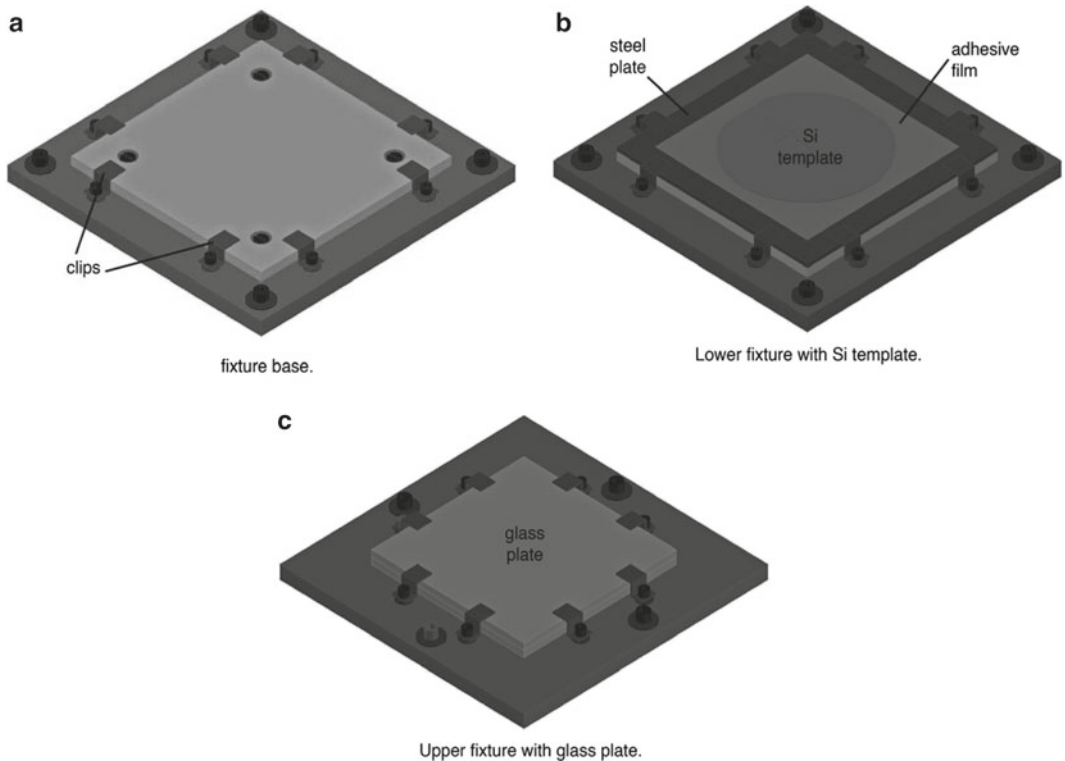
Schematic diagram of a custom substrate fixture. (a) Fixture base: A 150 mm² aluminum plate is bolted to a 200 mm² aluminum base, with thin stainless steel clips around the periphery of the base. (b) Lower fixture with silicon template: Fixture holds the silicon template bonded to a steel plate. (c) Upper fixture with glass plate.
